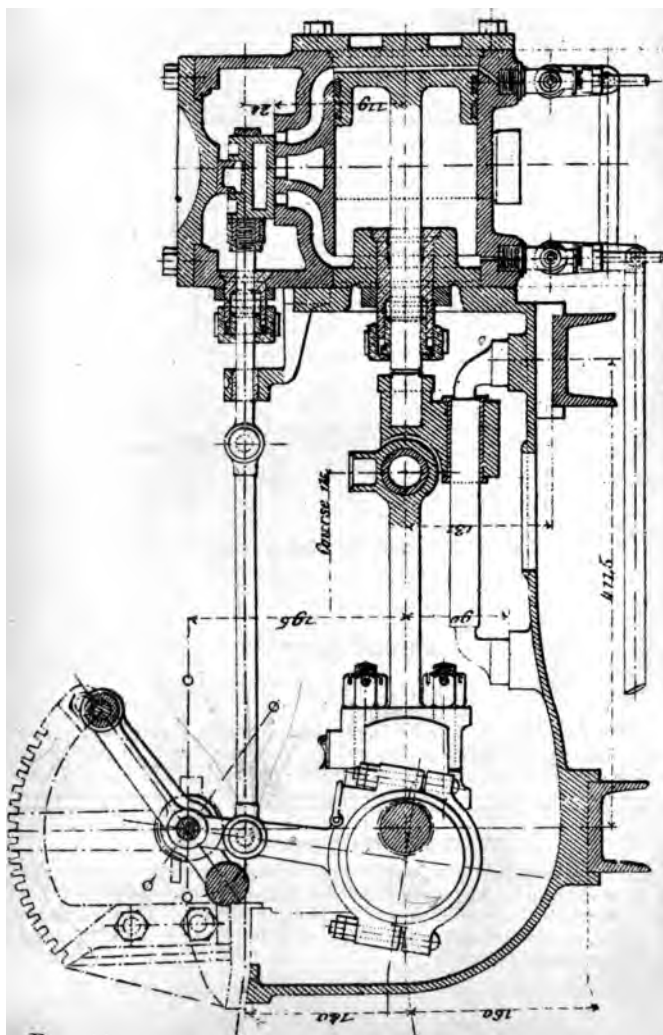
WIEDEKNECHT MOTOR: SECTIONAL ELEVATION.
